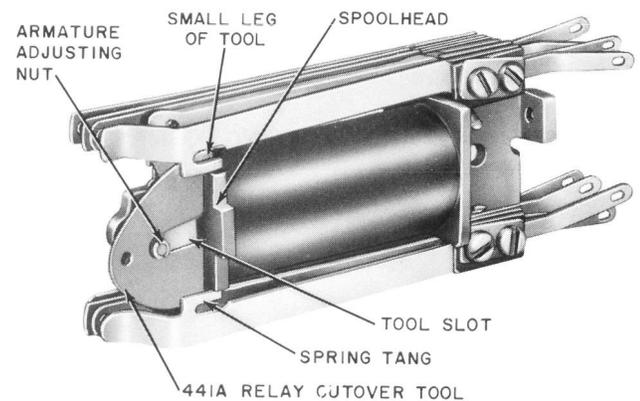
Blocking R1886 Relay for Cutover Purposes
